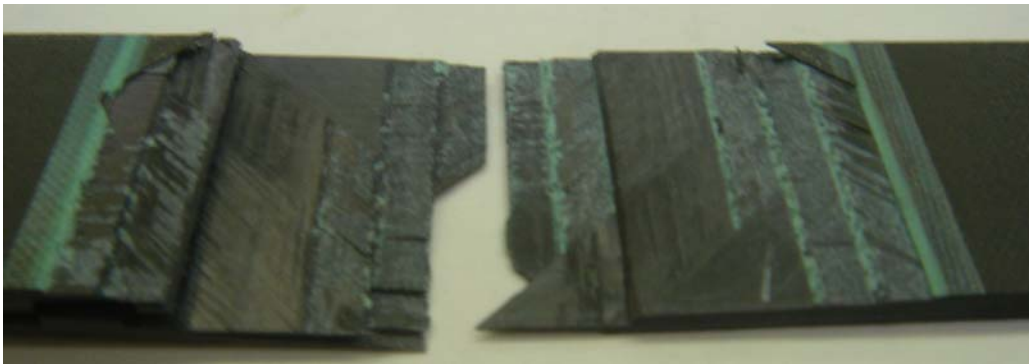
Fracture surface of stepped-lap specimen #5.
